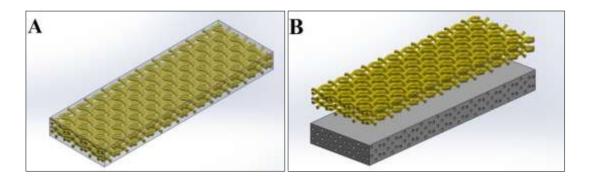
Composite modeled for simulation (A) Assembled view, (B) Exploded view
